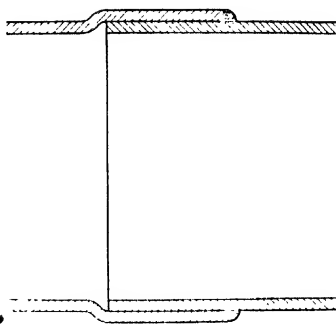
STEWARTS' SLEEVE-WELDED JOINT
